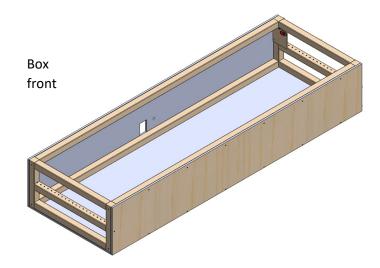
Attach front and back panel with shiny side inside. CAUTION: Avoid screwing into inner screws.
